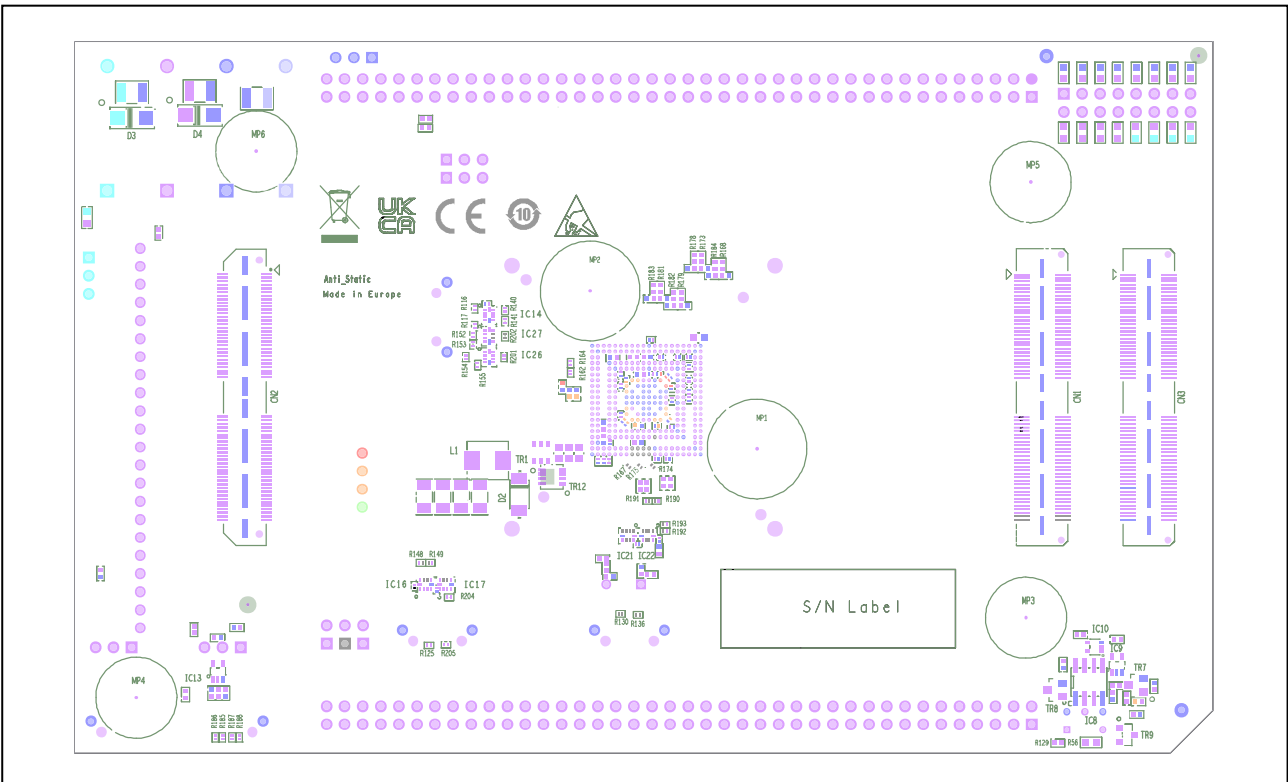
D018567_06_V02 Piggyback board bottom view
